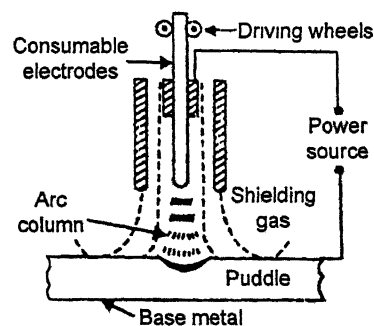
Metal inert-gas welding (MIG).
